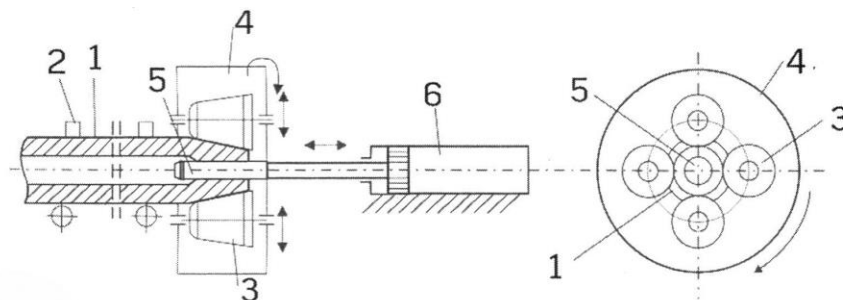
Scheme of preparation of the front end of the sleeve on the rolling machine: 1- sleeve, 2- clamp, 3- idle rollers, 4- faceplate, 5- mandrel, 6—mandrel hydraulic drive
